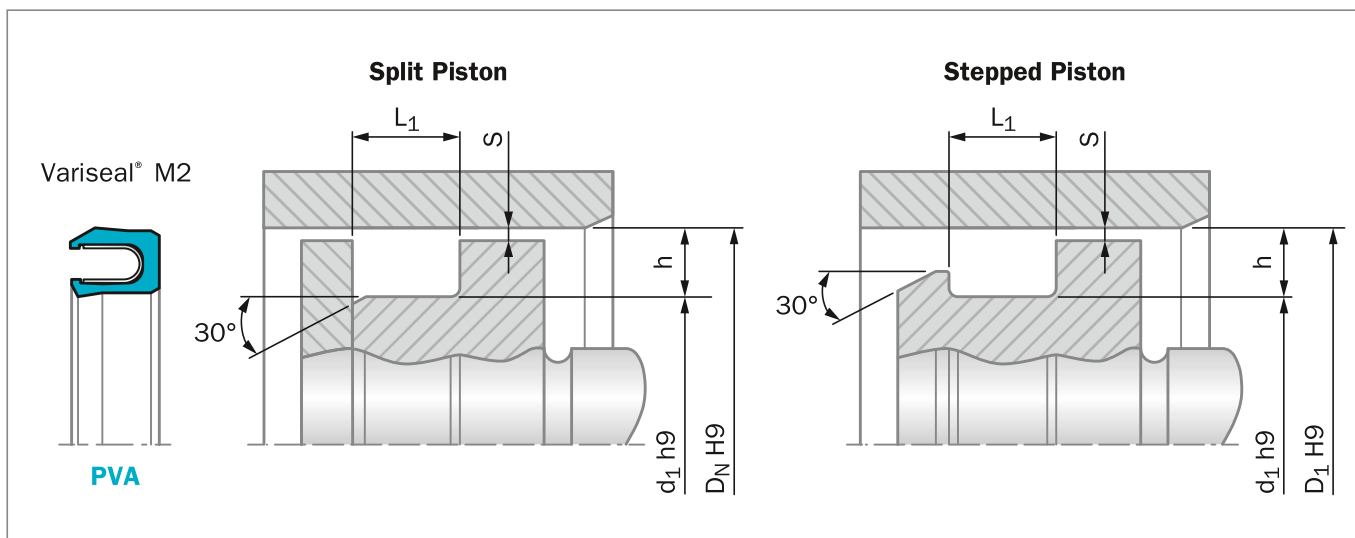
Installation Drawing, see Figure 136 for addition groove details
